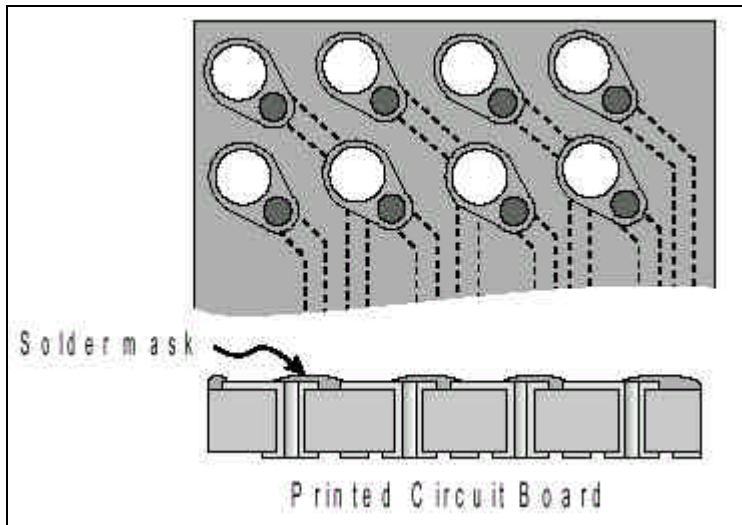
Printed Board Flip Chip or Grid Array Land Patterns
